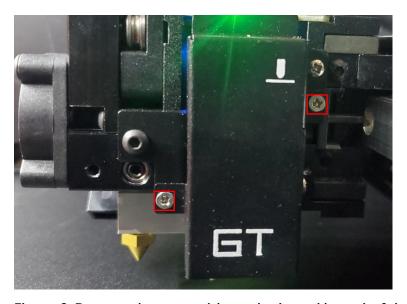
Remove the screws (shown in the red boxes) of the auto-leveling assembly cover.
